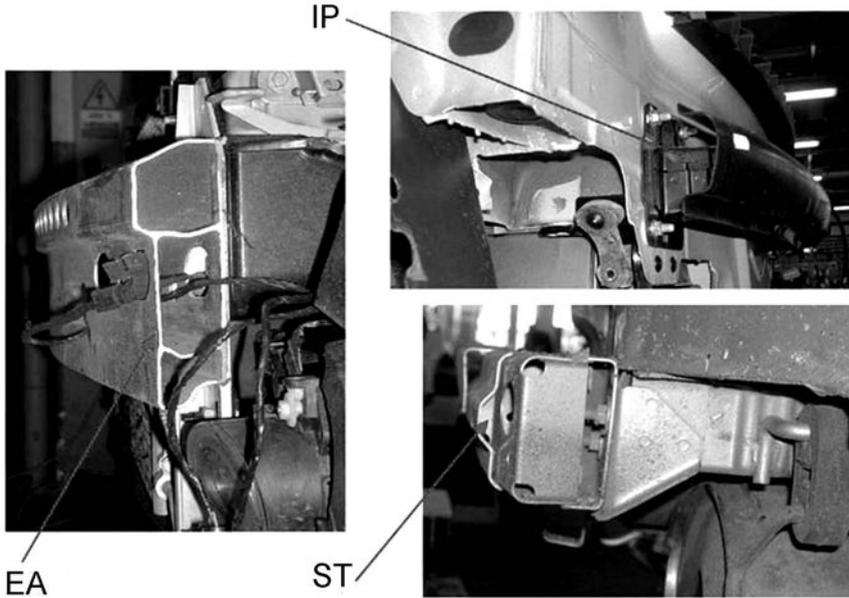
Examples of different materials and technologies for bumper cross member. IP: injection molded thermoplastic; EA: extruded aluminum; ST: steel.
